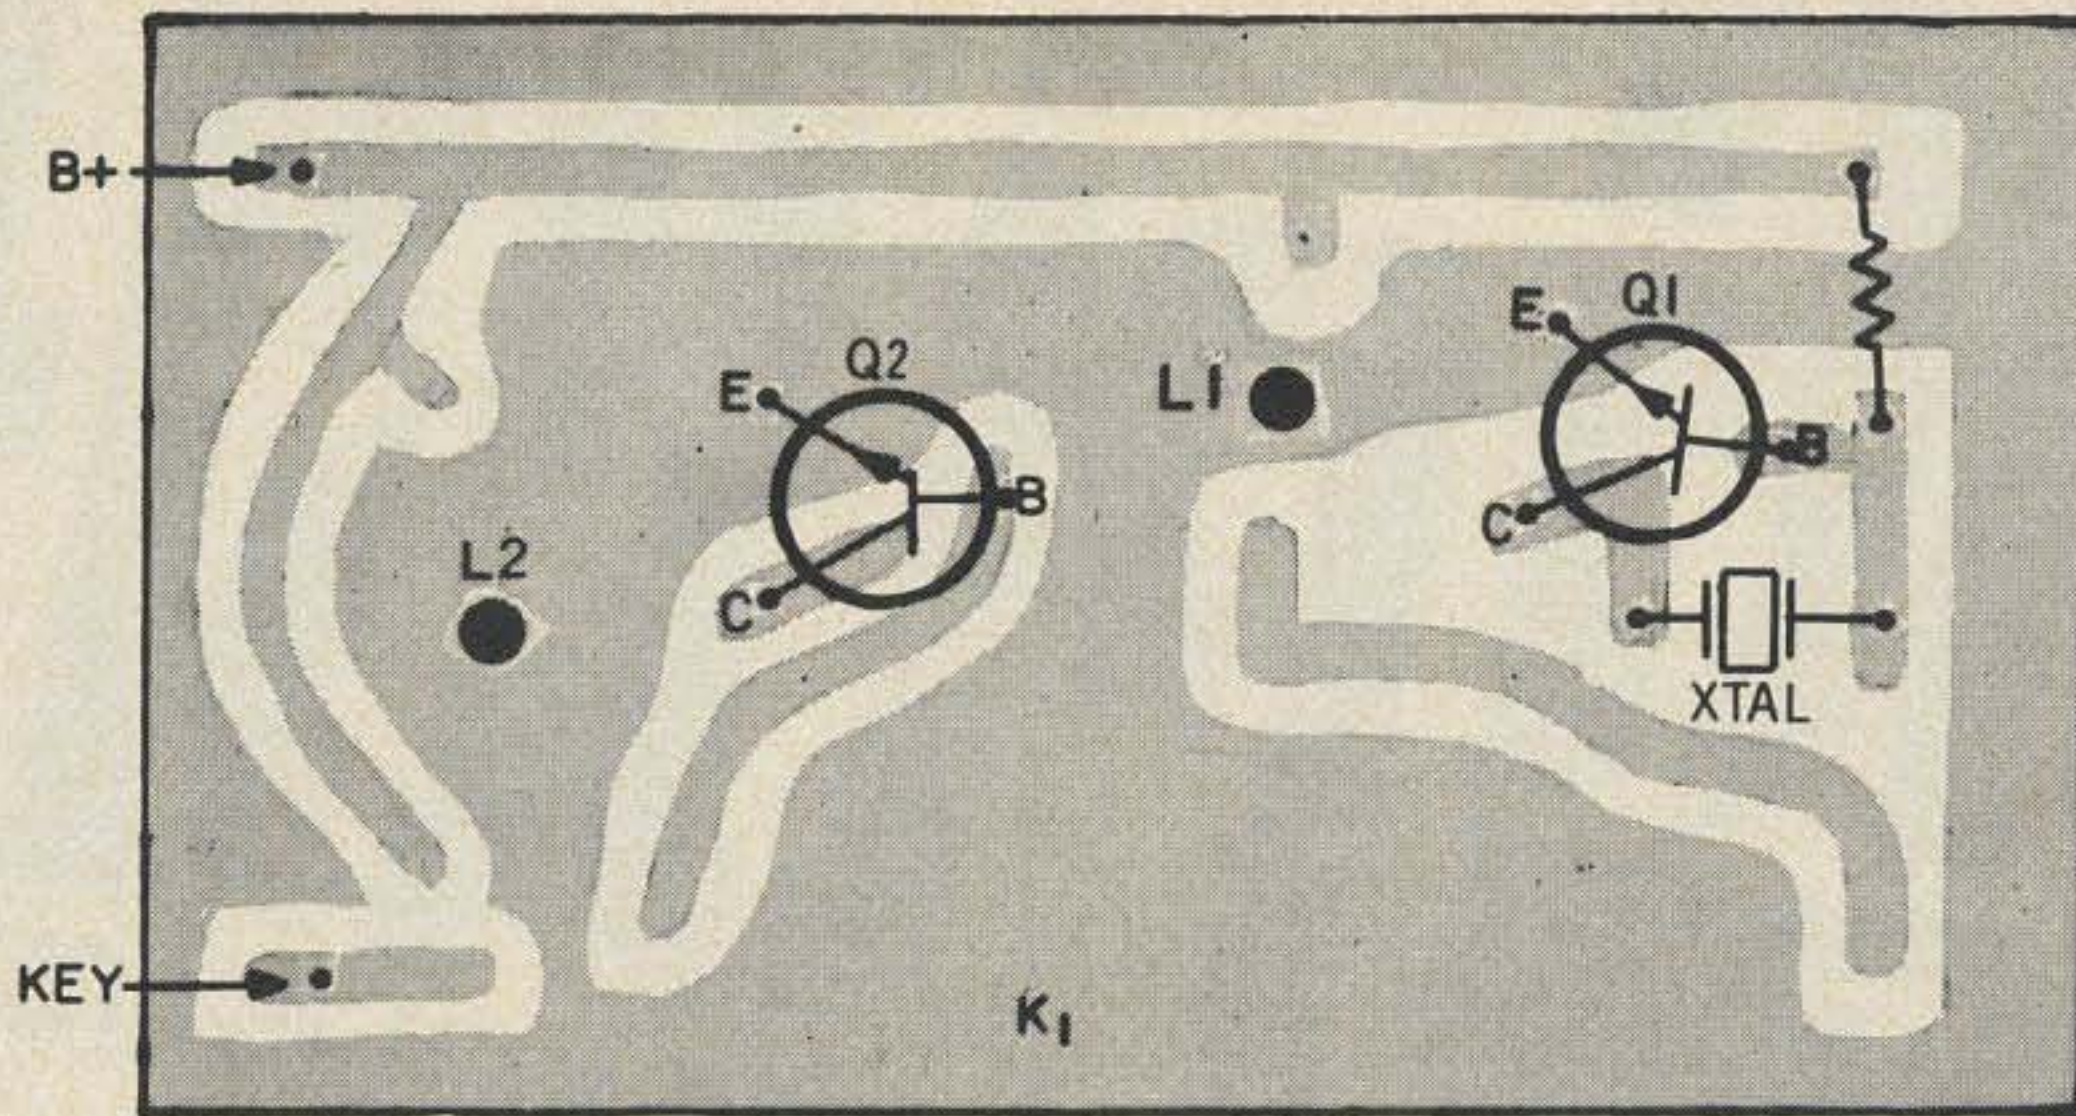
Printed circuit board. Layout is not critical, this is merely a suggestion.
